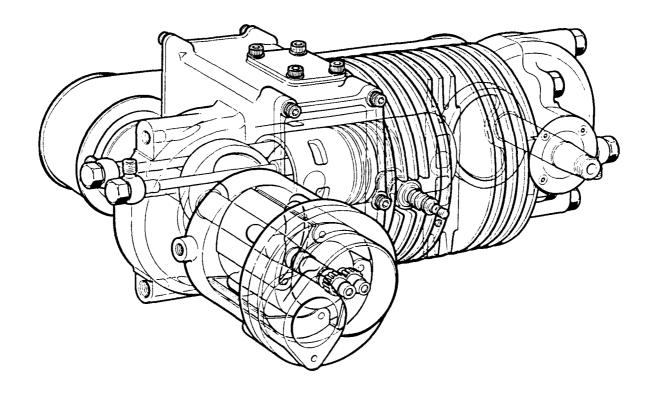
67mL CAM ENGINE - CAM AND FOLLOWER
